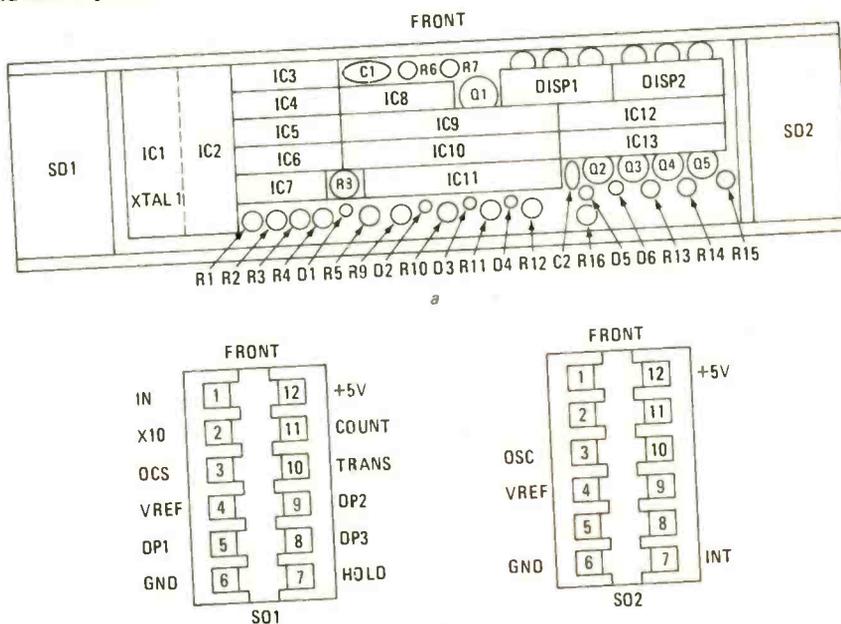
INTERNAL LAYOUT of probe showing component placement. Location of signals on socket pins is shown in b.
